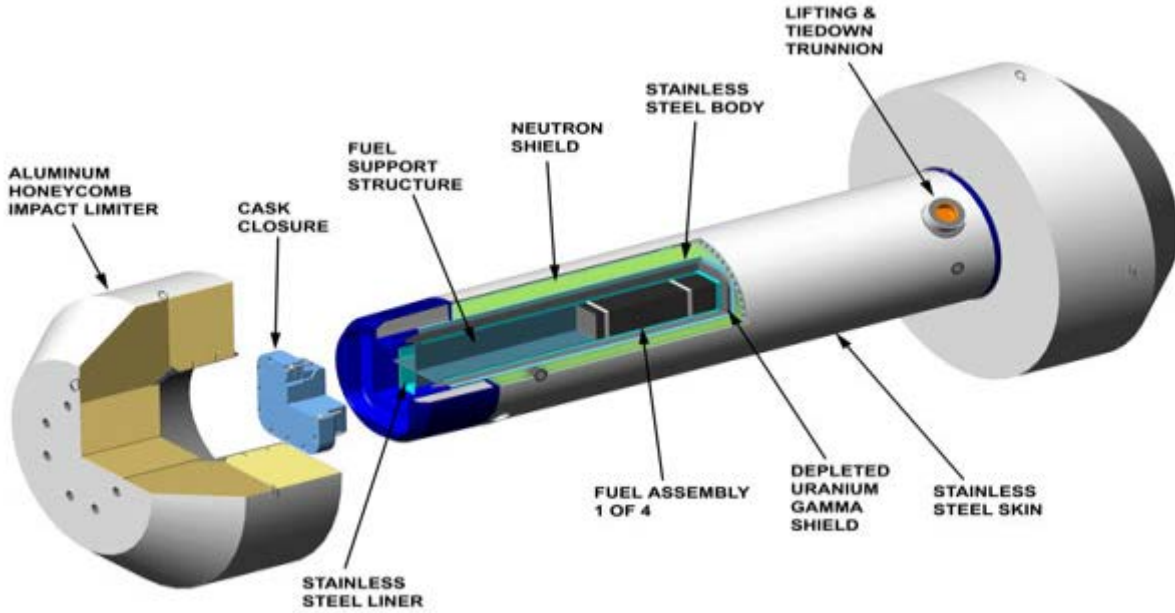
GA-4 Package: Exploded View (General Atomics 1998)
